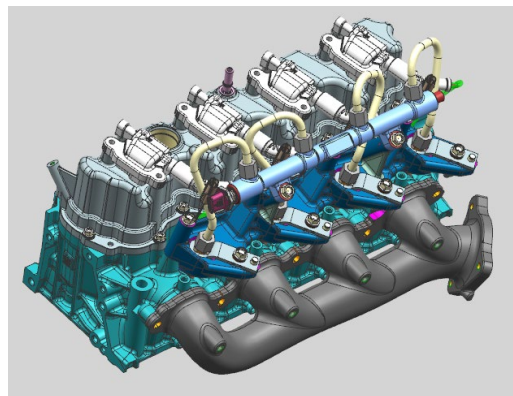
"Ultra" high-pressure injection system adapted to proposed advanced combustion system cylinder head assembly – exhaust side view. Source: GM.
